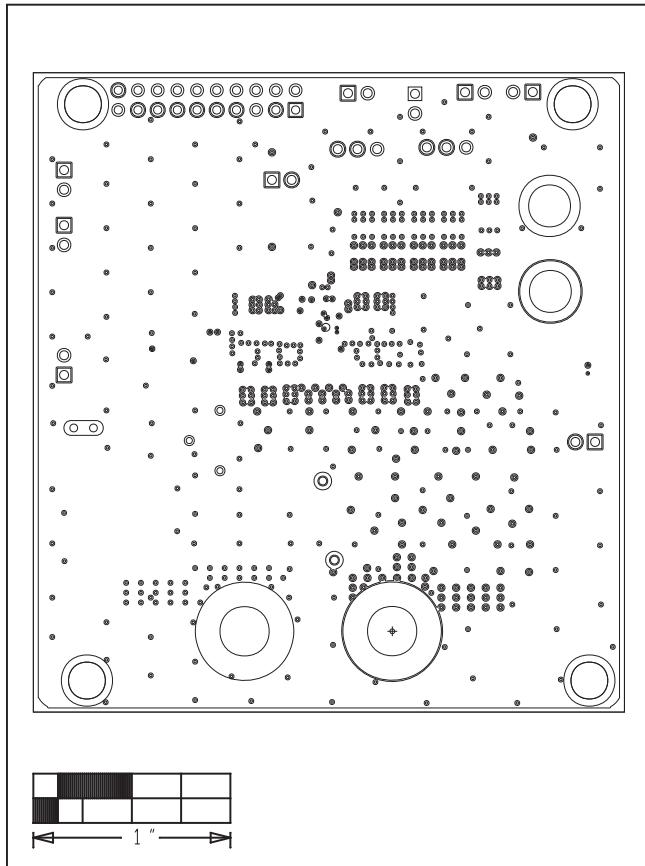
MAX20499C EV Kit PCB Layout—Inner Layer 3
